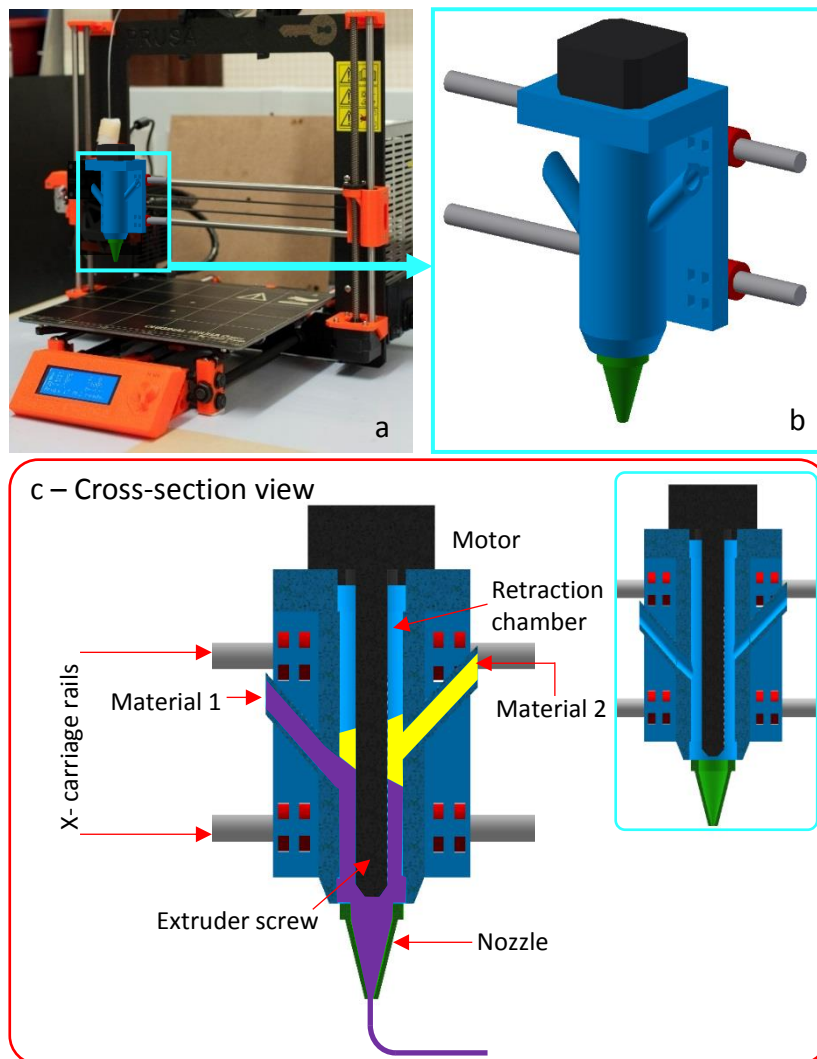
Schematic of suggested multi-material paste extrusion set-up with finer deposition. (a) Visualisation of the print-head with Prusa MK2S (b) close-up view of the print-head housing motor and deposition nozzle (c) cross-section view of the print-head showing the extruder chamber during multi-material printing with an empty chamber shown in insert.
